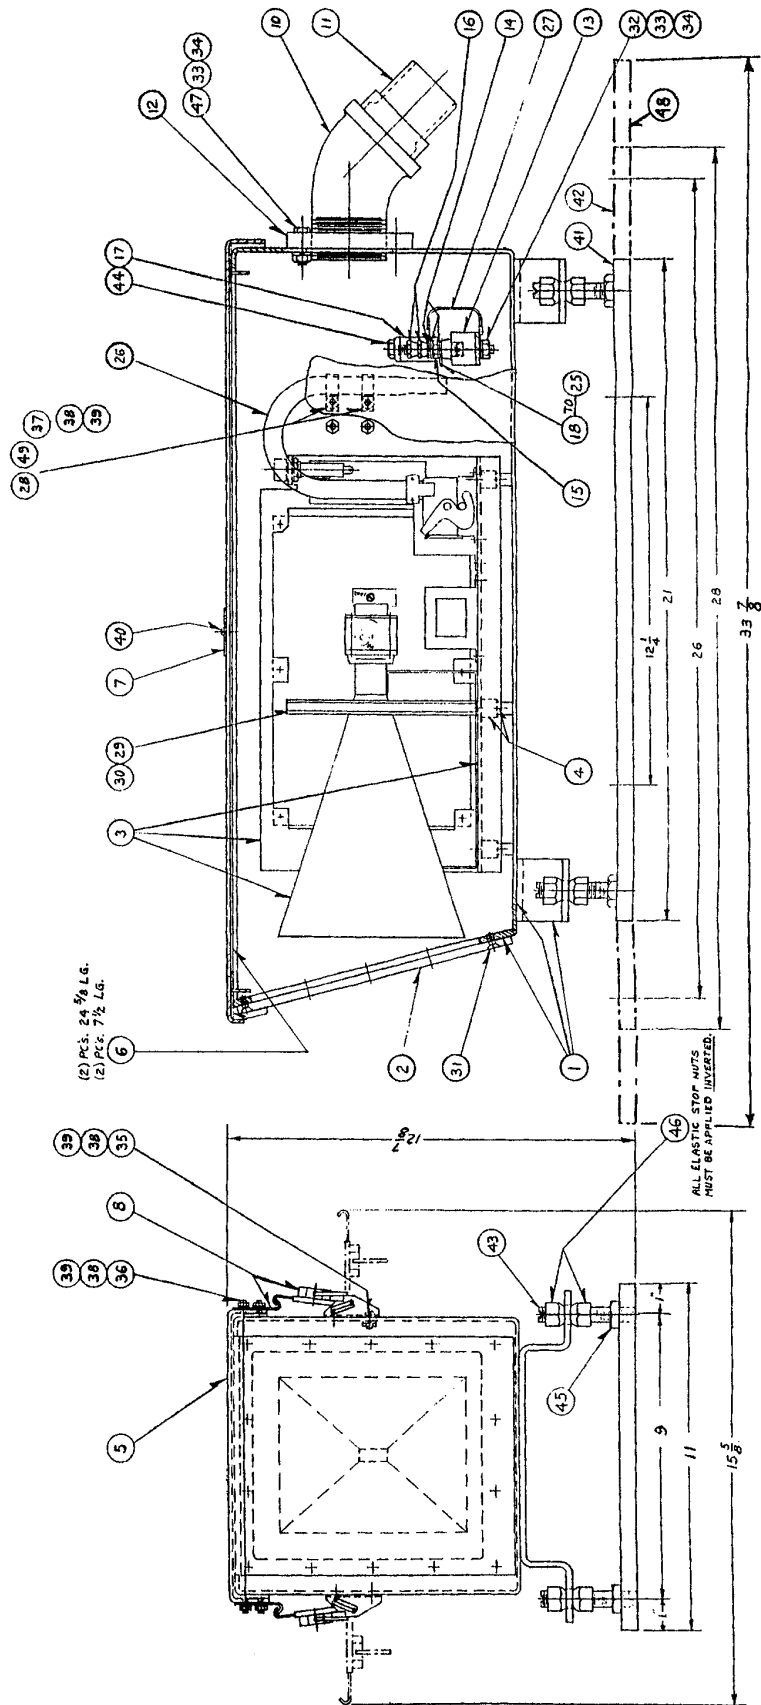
(b). DR-50 Radar Main Assembly Parts Location.
